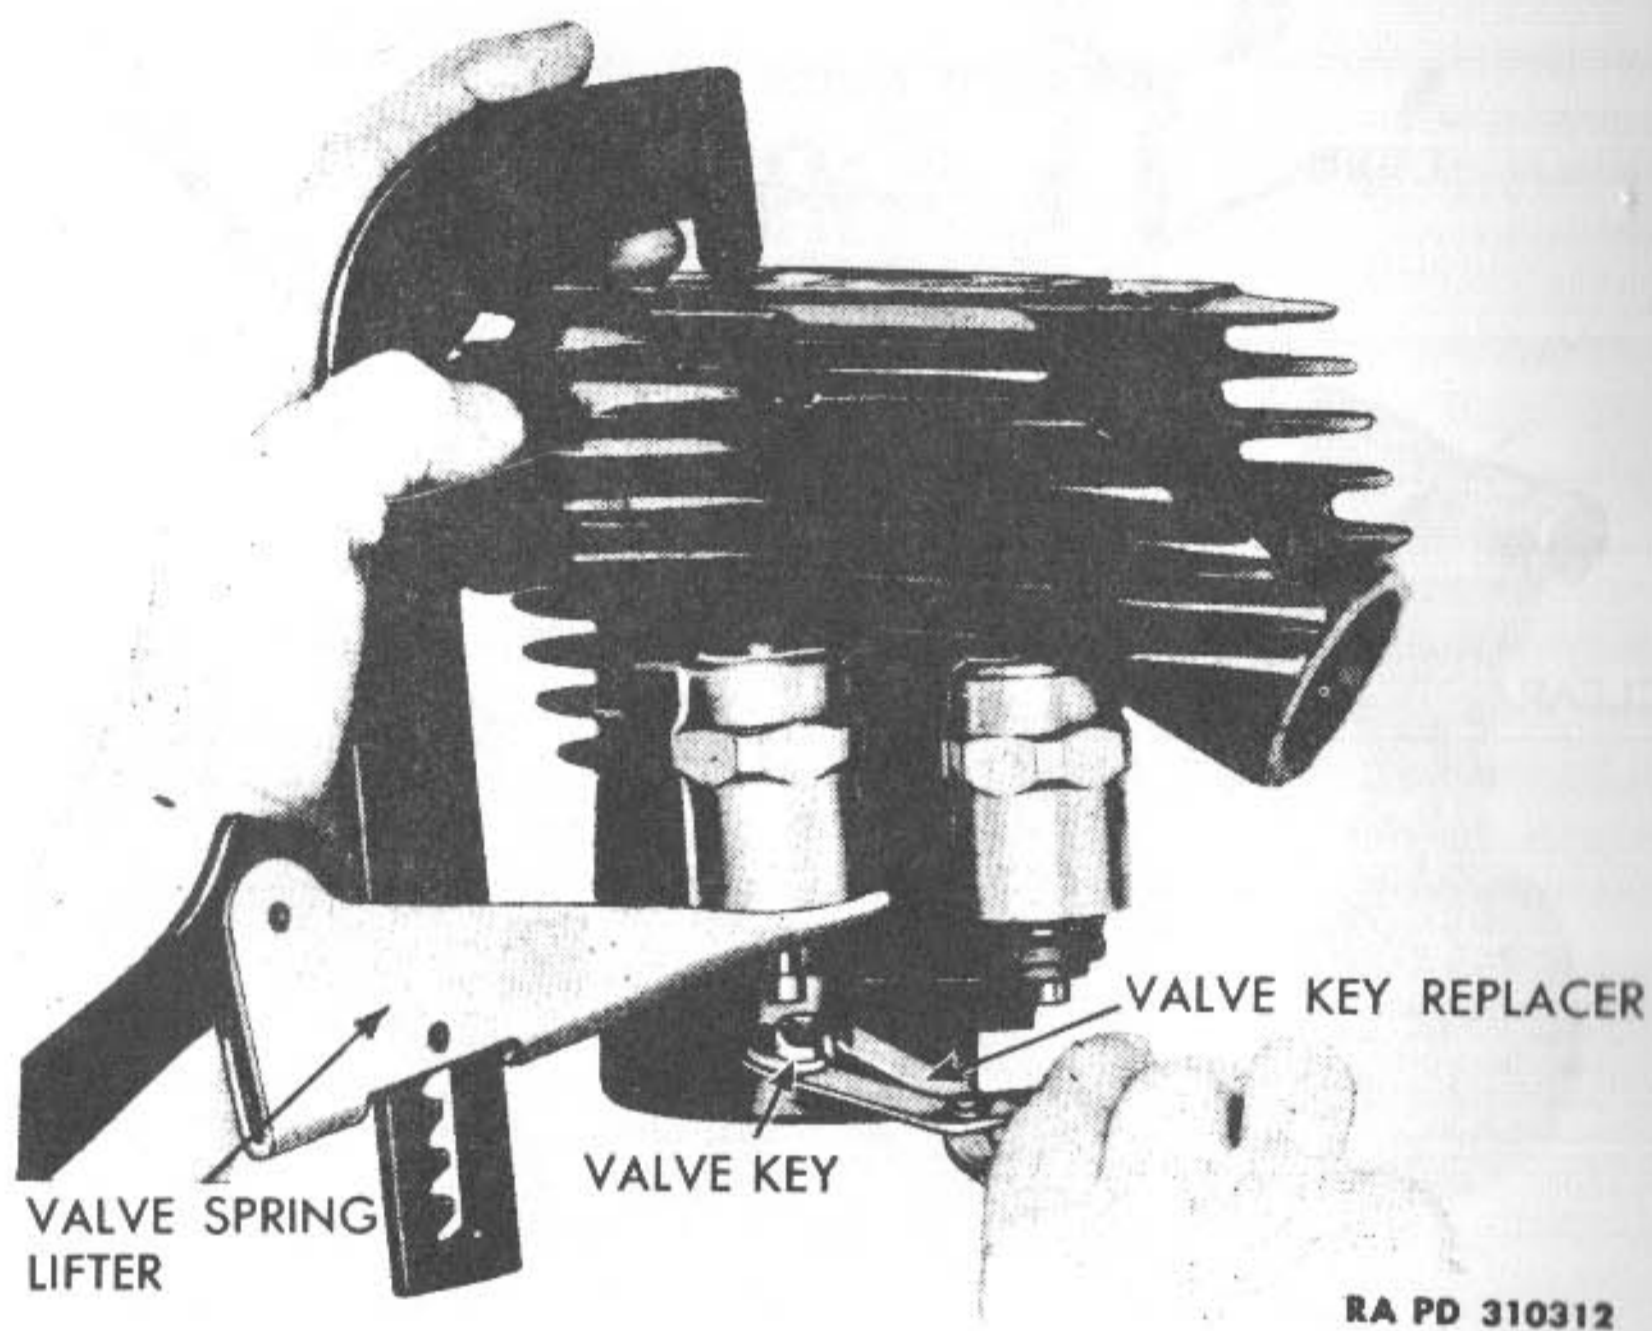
Installing Valve Stem Collar Keys, Using Lifter (41-L-1409) and Replacer (41-R-2398)
